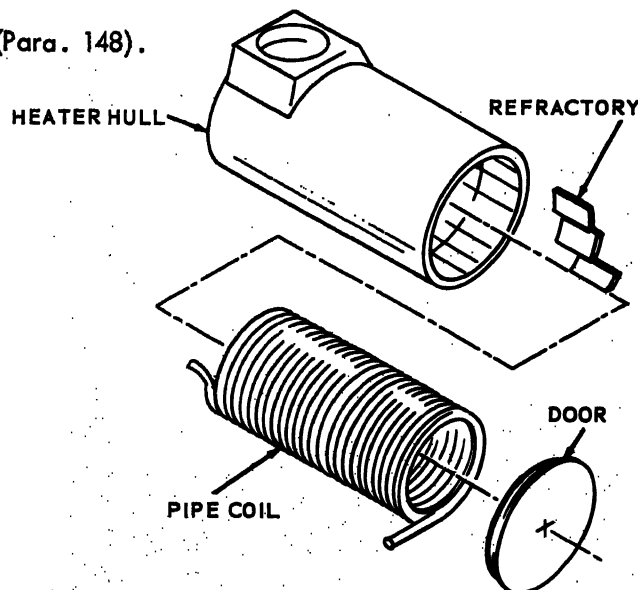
REMOVAL AND ASSEMBLY OF PIPING AND REFRACTORY
